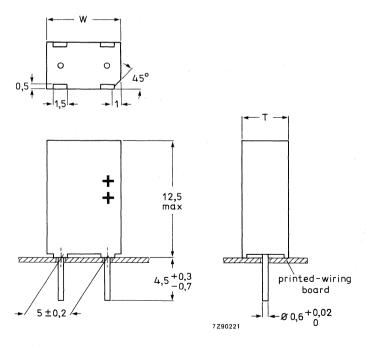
Style 1; see Table 1a for dimensions T and W.
